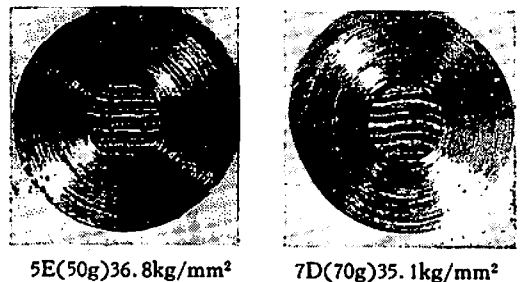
Separating appearance at bonded surface (mild steel-mild steel explosive welding)
